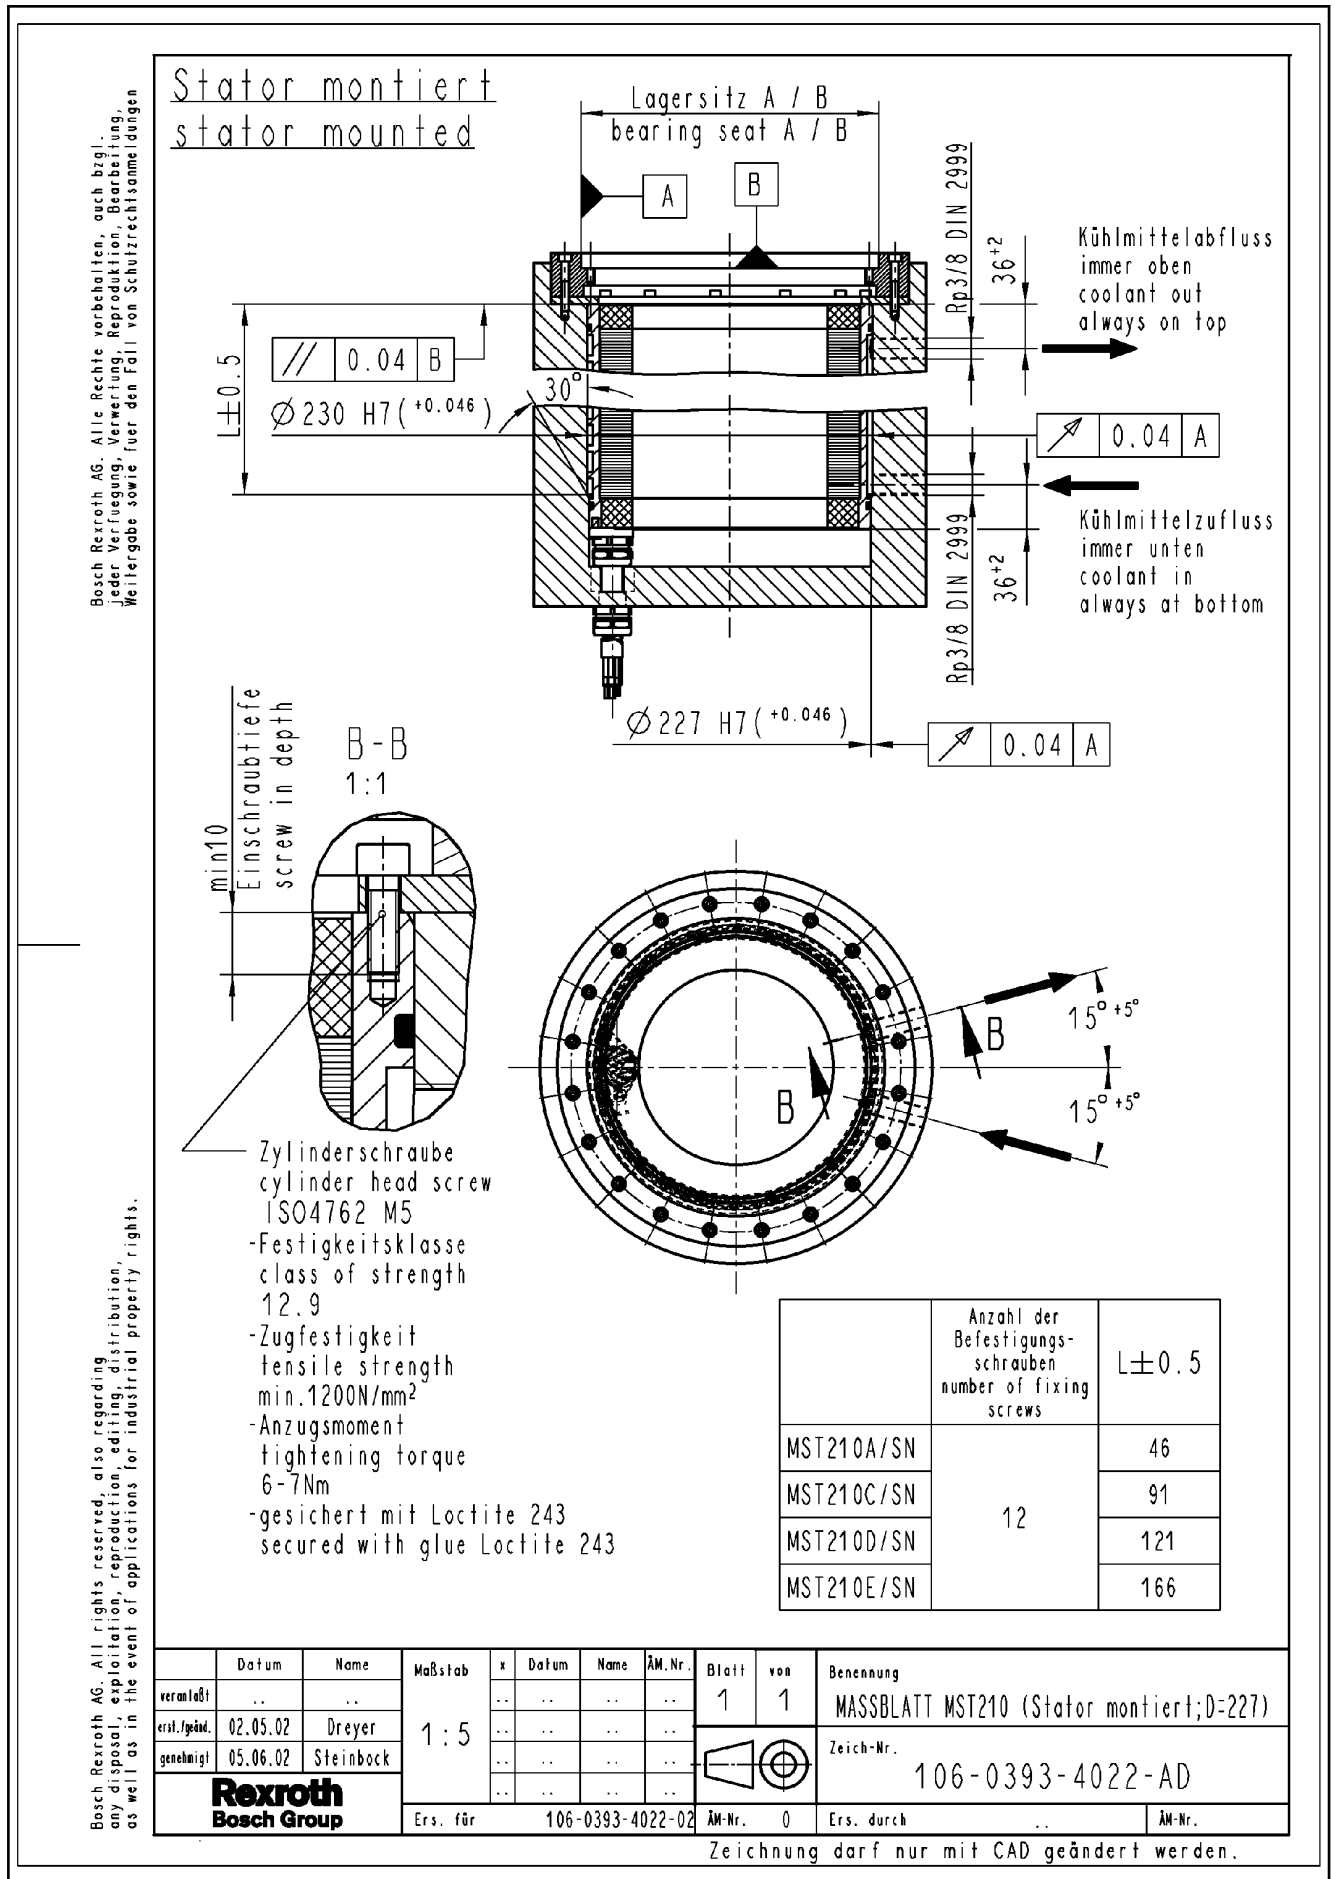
Dimension sheet for stator MST210, mounted ("SN")
